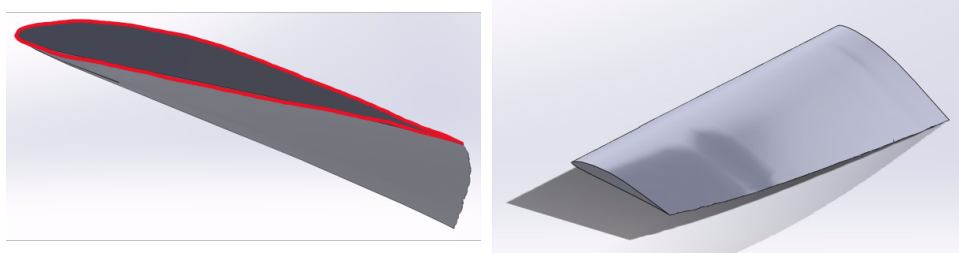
Cross-section of rotor blade (left) outlined in red and 3D view of rotor blade (right)
